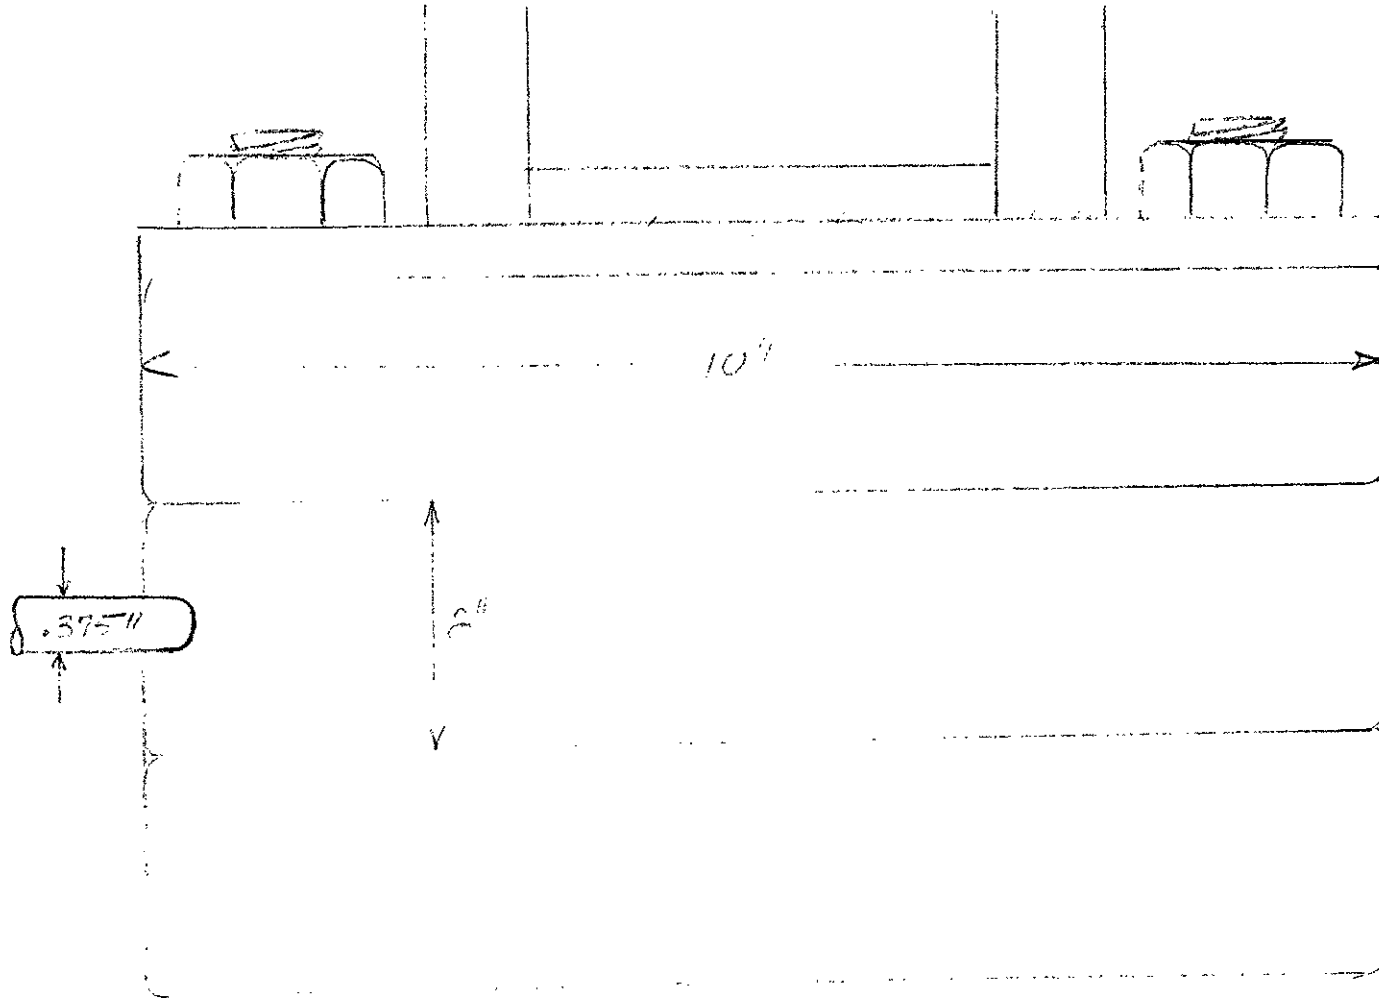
LOWER ASSEMBLY SCHEMATIC PICTURE
